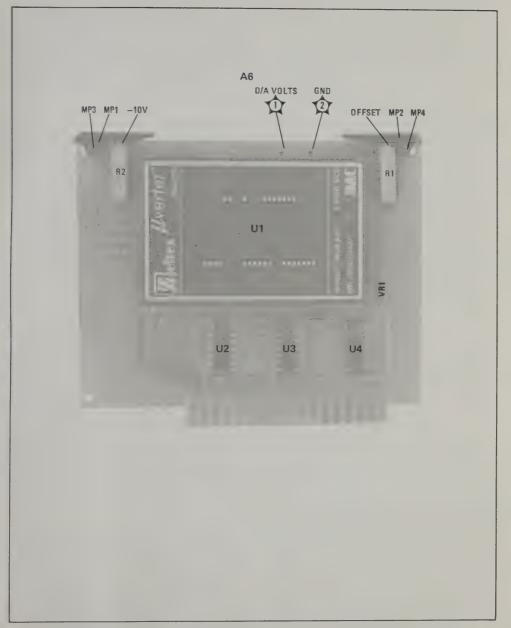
A6 BCD Programming Assembly, Component Locations (Option 001)
